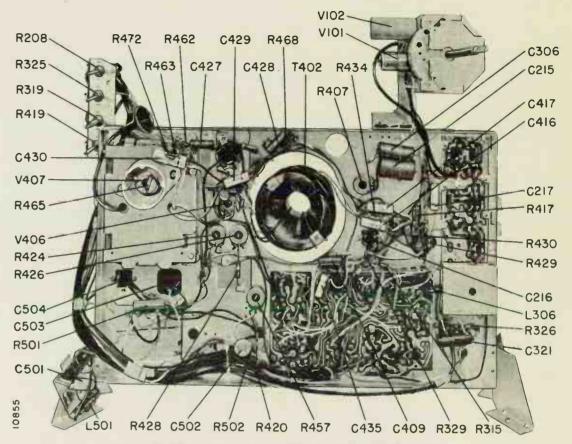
Wiring Side of Chassis With Single Ended Sound Amplifier.
